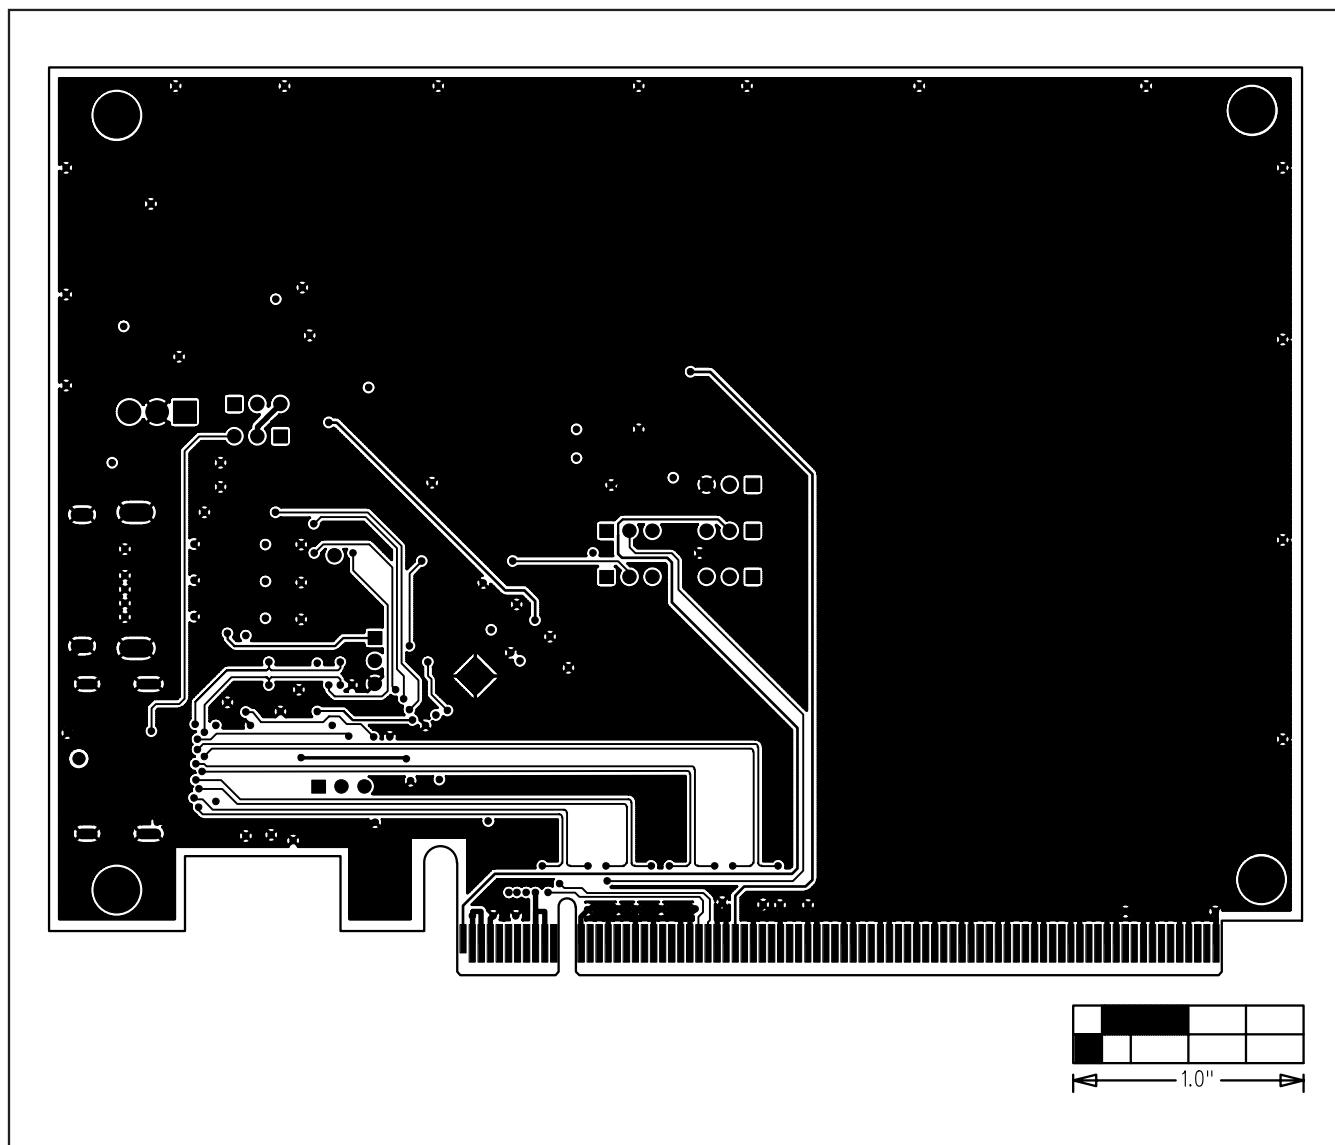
MAX9406 EV Kit PCB Layout—Solder Side
